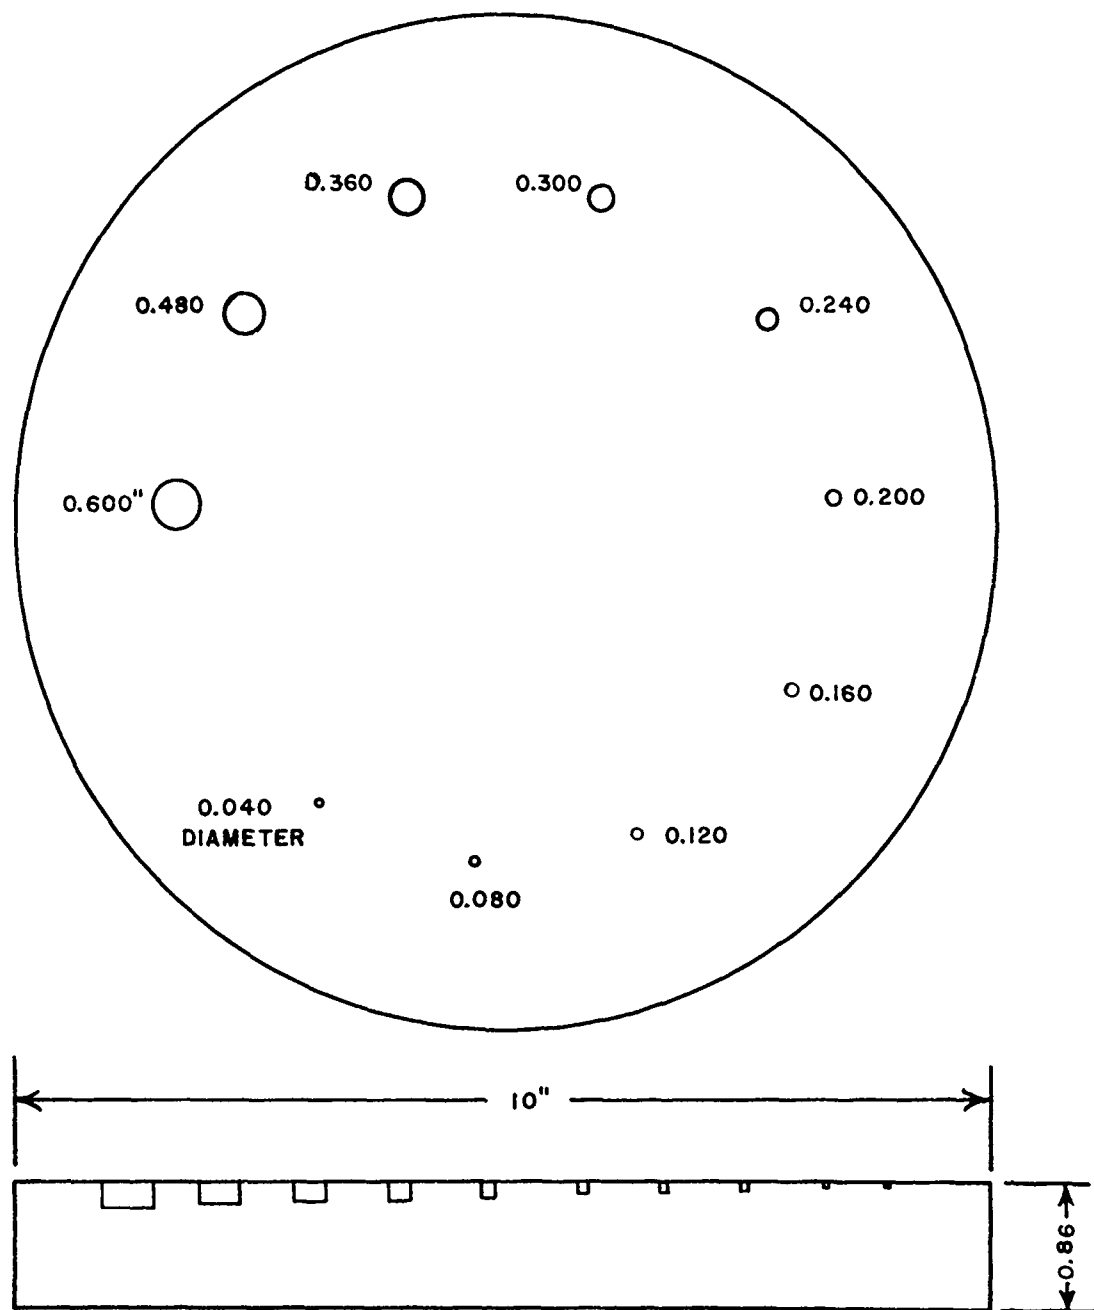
THE CAST EXPLOSIVE PENETRAMETER
